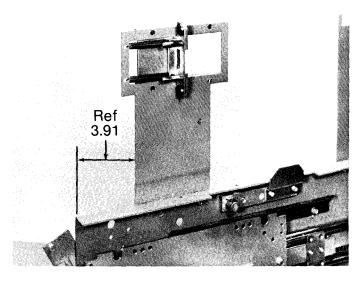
343L806G2 Disconnect assembly (24 pin) installed. 343L806G9 similar except 12 pin disconnect.
